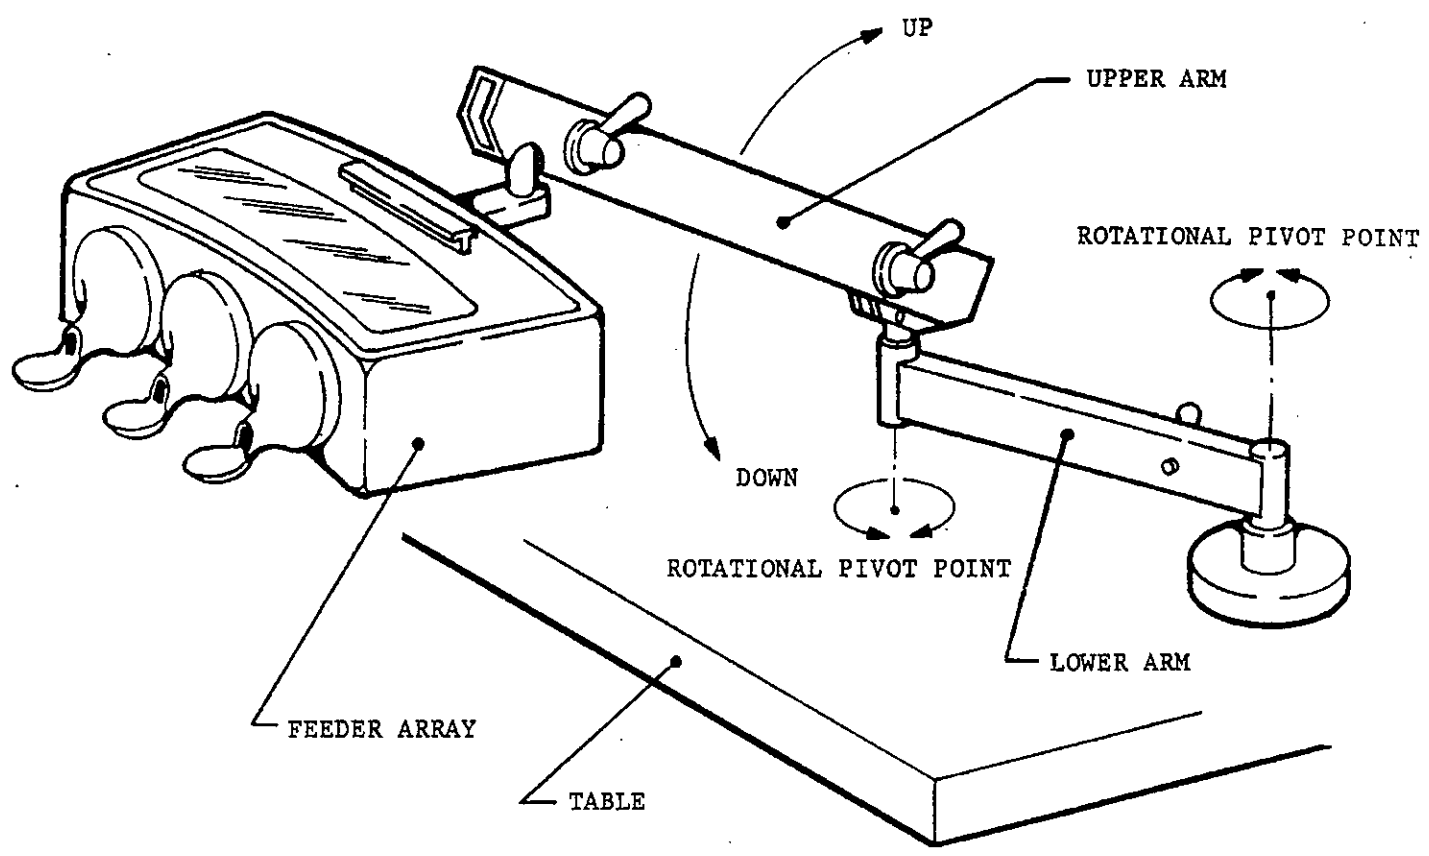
UNITIZED THREE DISPENSING MODULE MOUNTED ON POSITIONING ARM
